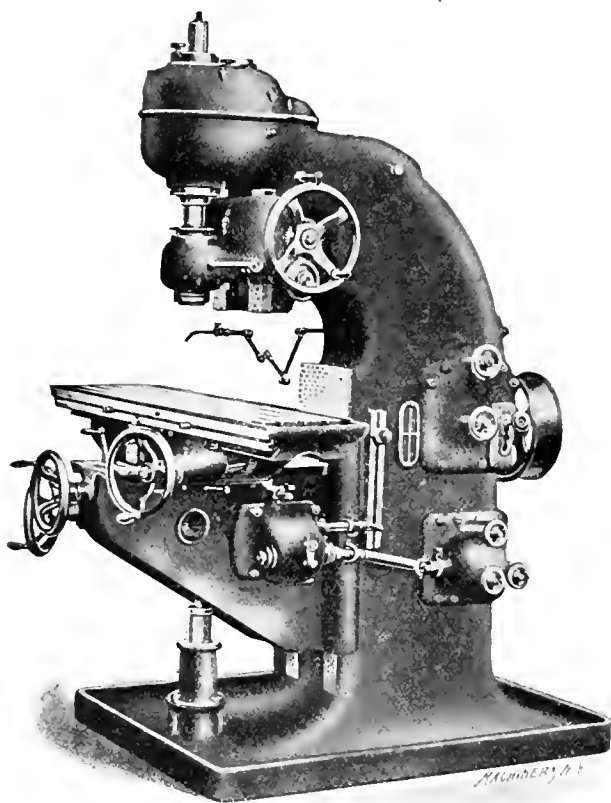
Wanderer Fahrradwerke No. 3 Vertical Milling Machine.
